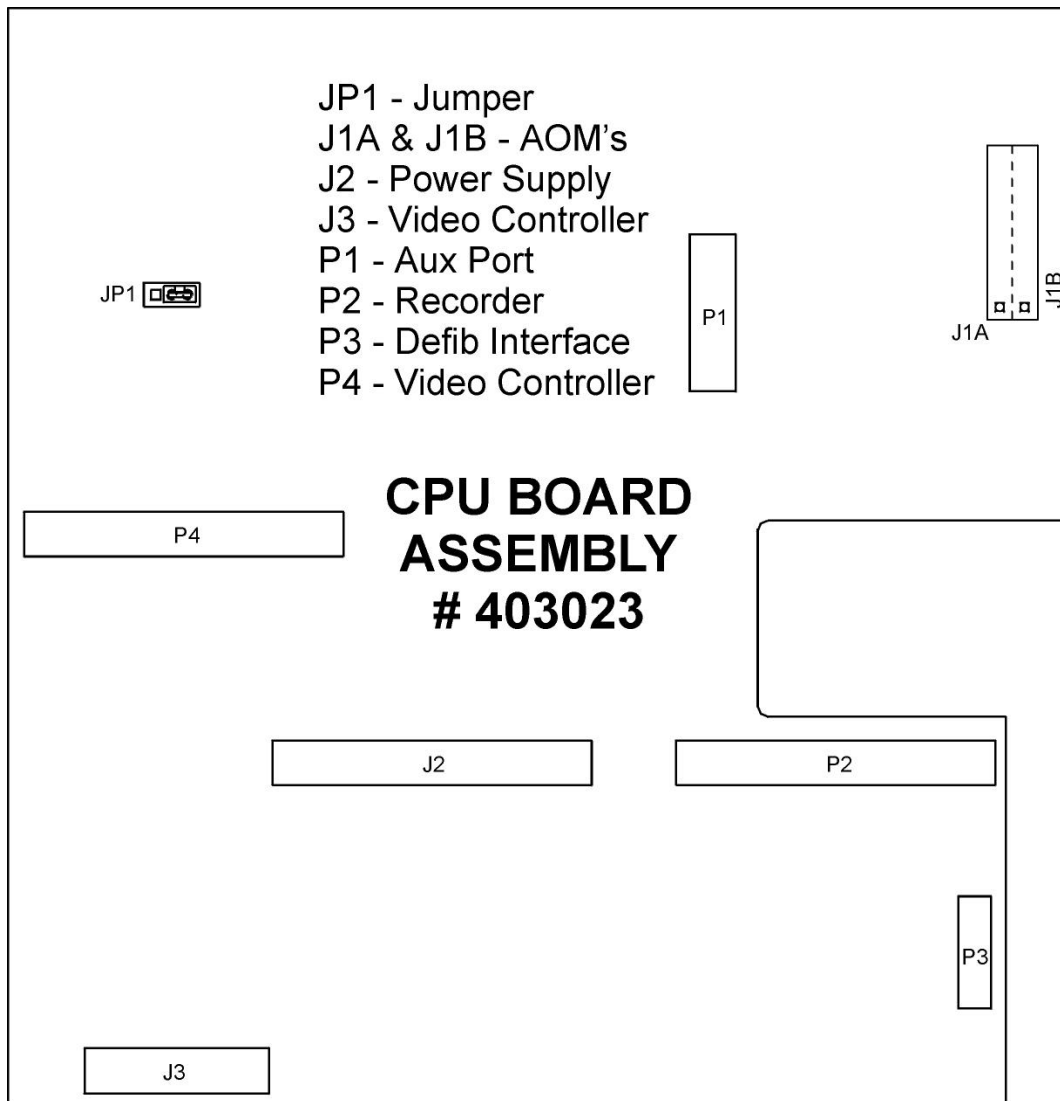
Connector Identification for PRISM CPU Board Assembly # 403023
